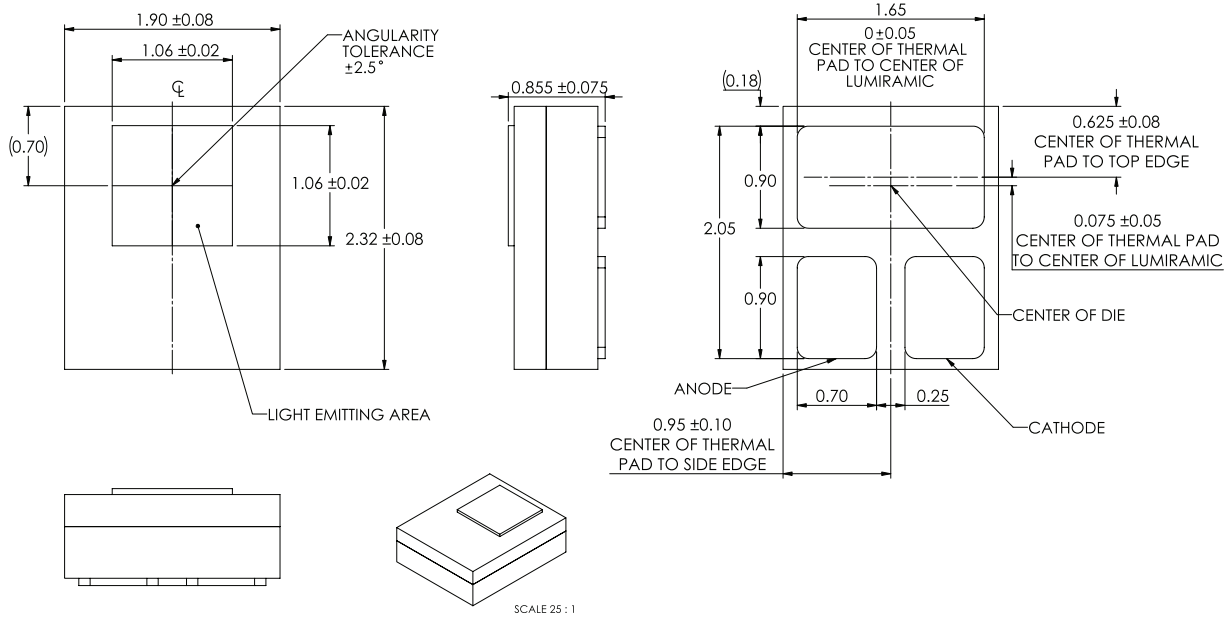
Mechanical dimensions for LUXEON FX Plus Cool White.
